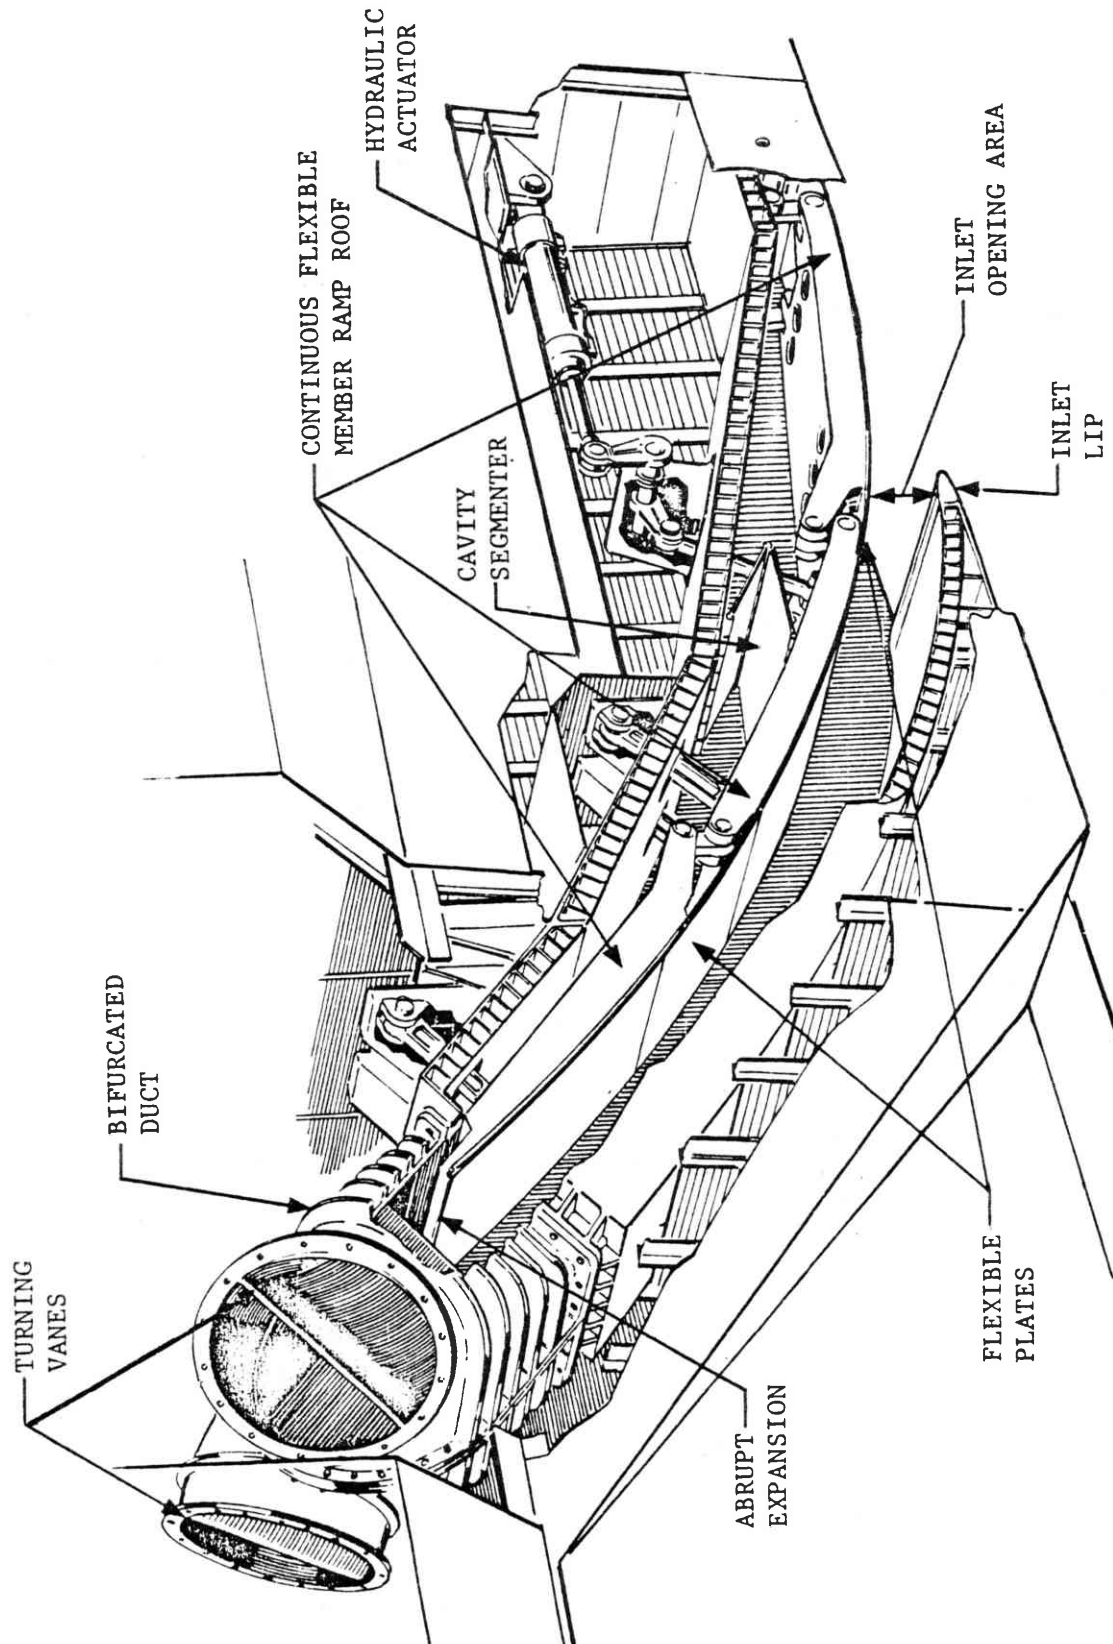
Waterjet inlet duct and adjustable ramp roof
